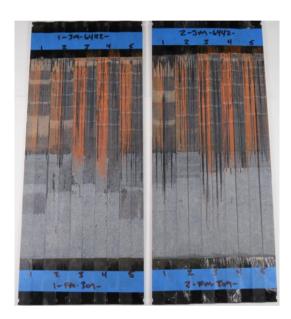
Fracture surfaces for two panels, previously laser treated, showing uniform cohesive failure mode. Panel 1 is left, Panel 2 is right (see Table 1 for details).
